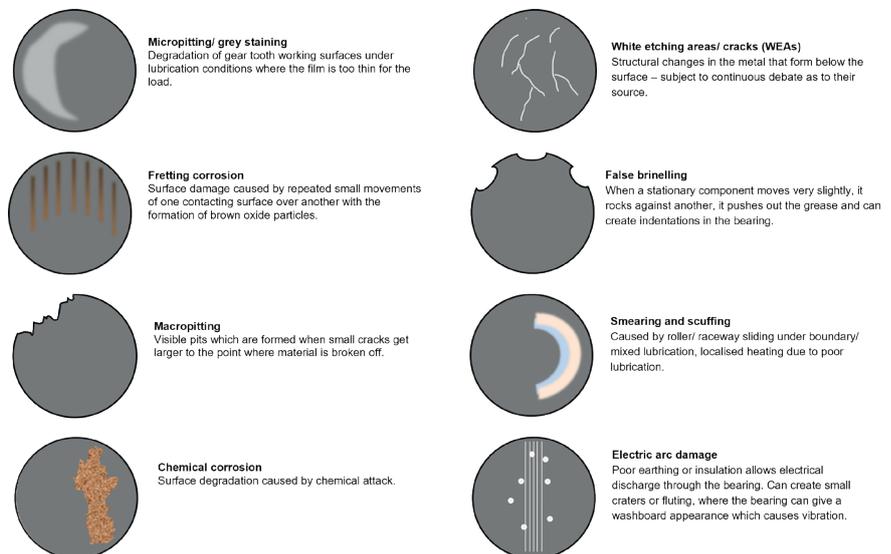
some of the main damage and failure modes within wind turbine gears and bearings
